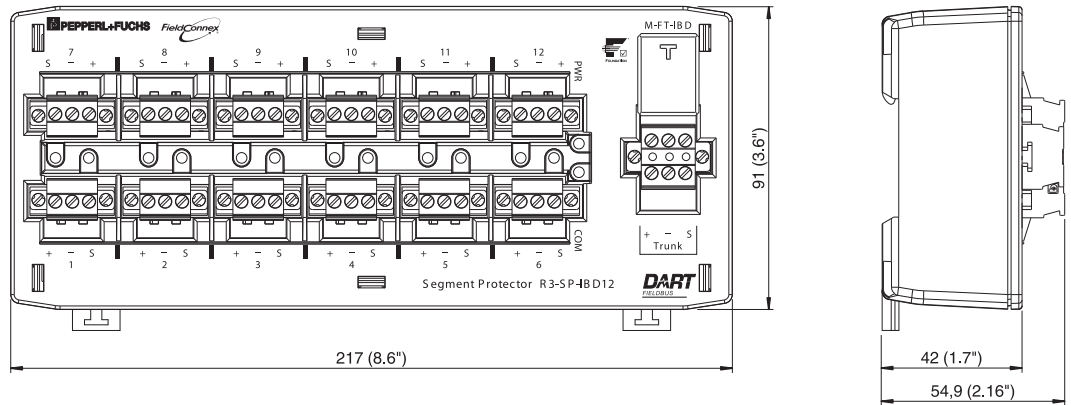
Dimensions Segment Protector R3-SP-IBD12
